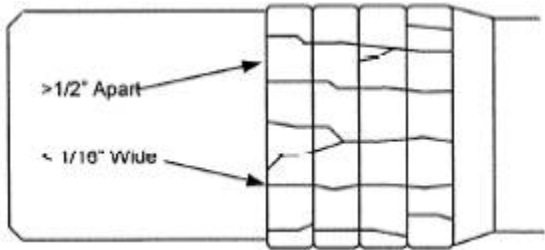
illustrates an acceptable configuration of transverse cracks. Crack widths are less than 1/16" and cracks extending the full width of the hardband deposit are greater than 1/2" apart.
